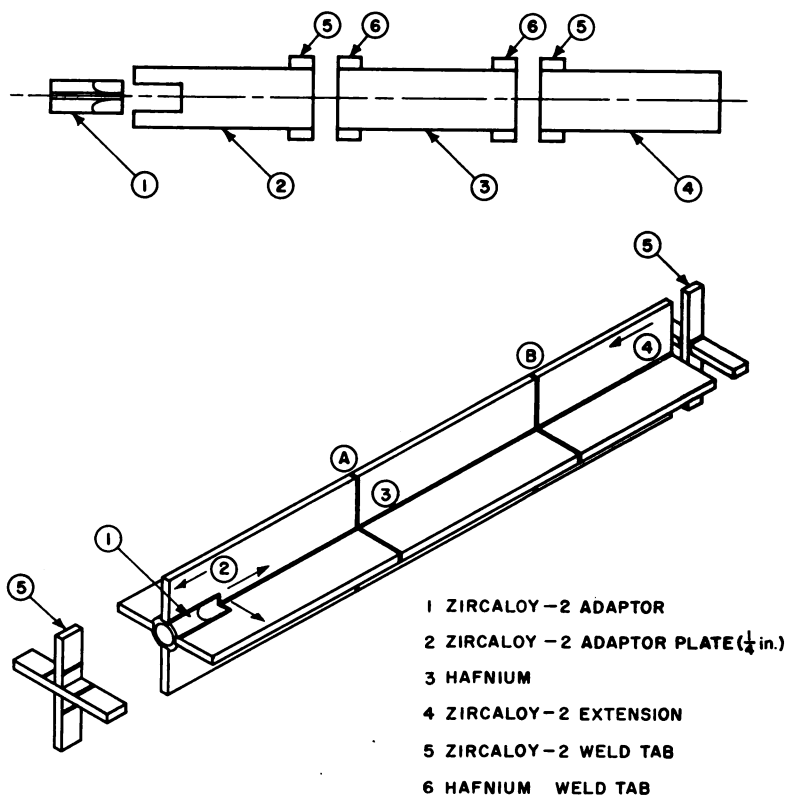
Schematic Representation of a Typical Control Rod Showing Location of Hafnium Section and Zircaloy-2 Section and Welds; Weld Tab Locations Are Indicated in the Upper Sketch.
